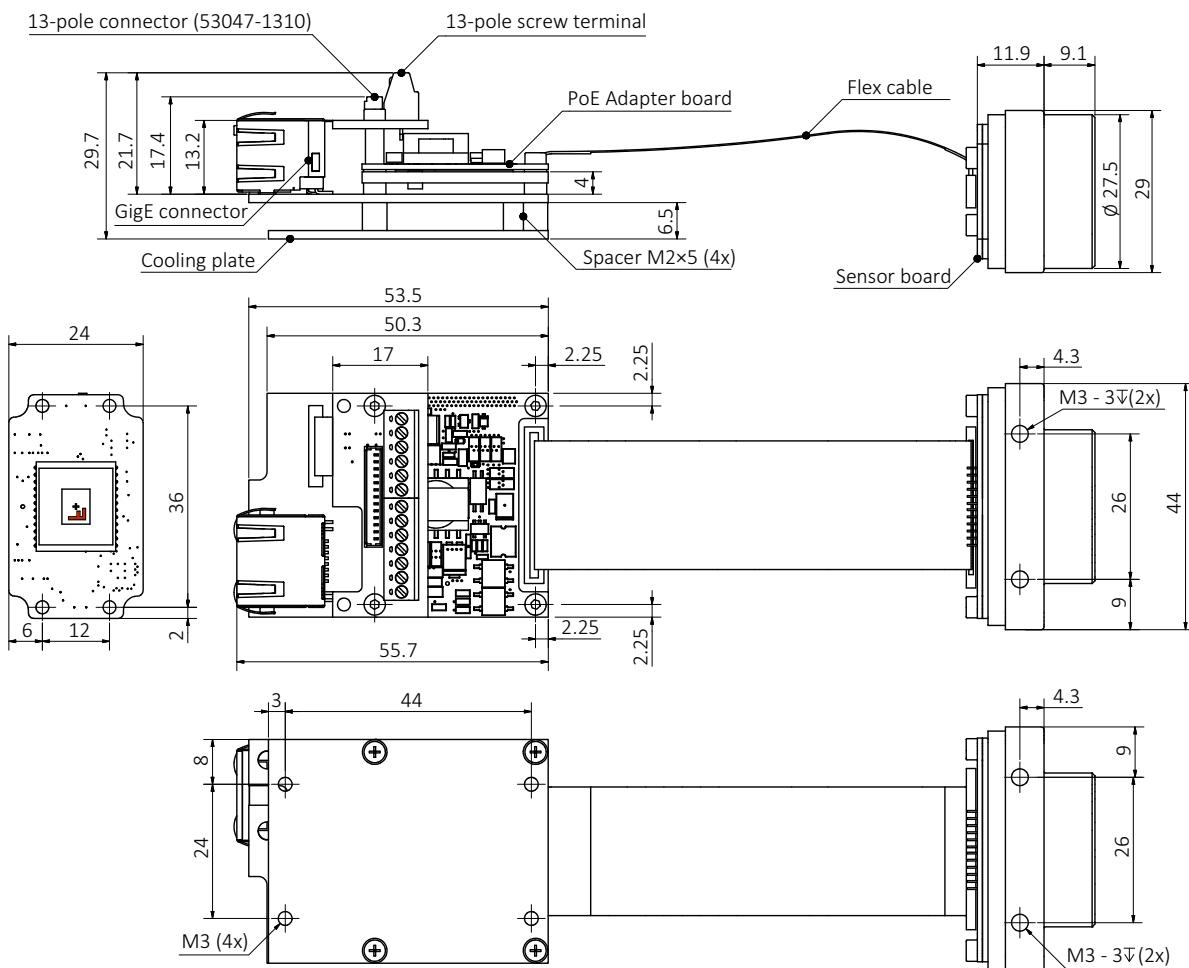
Manta type A board level with C-Mount (PoE models) dimensions
